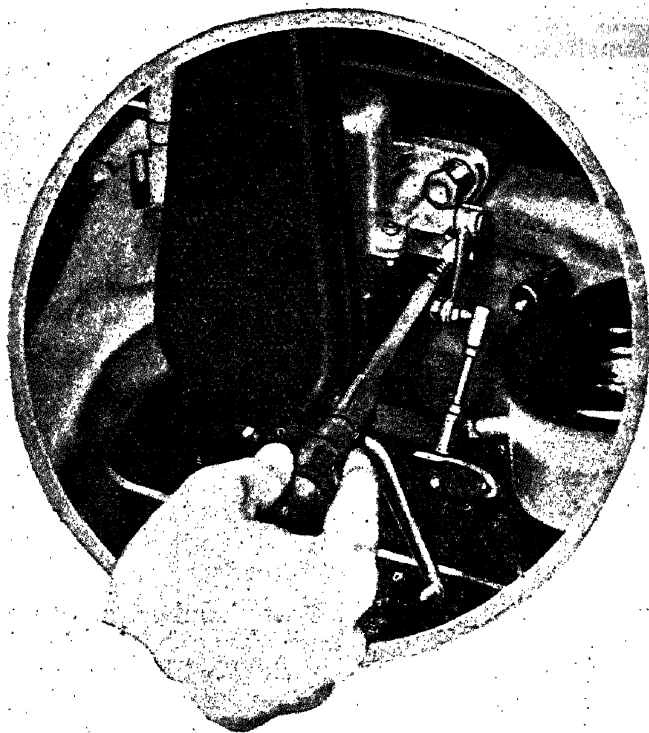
Adjusting the Slow-running Screw on S.U. Carburettor.
